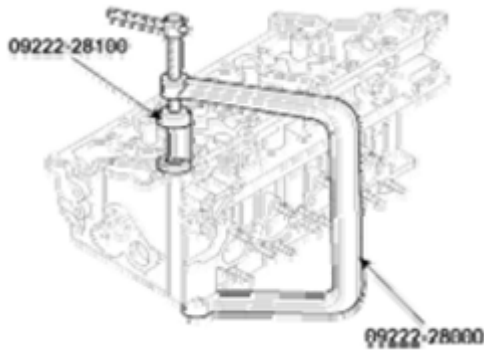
Compressing Valve Spring & Removing Retainer Lock Using SST
